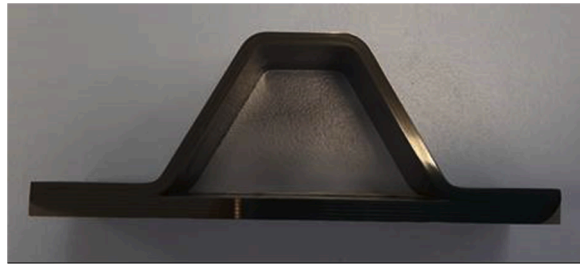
Sample for microscopic inspection of the welding line.
